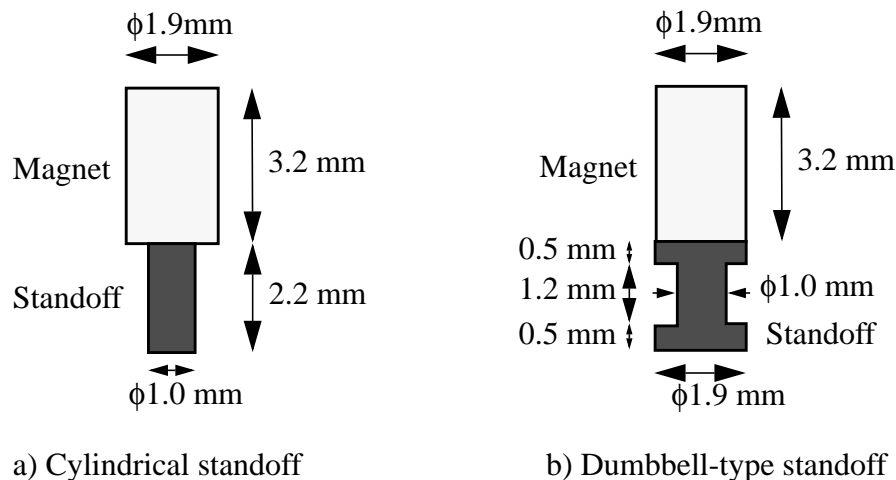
Dimensions of magnet/standoff assemblies using a) a conventional cylindrical standoff and b) a dumbbell-type standoff.
